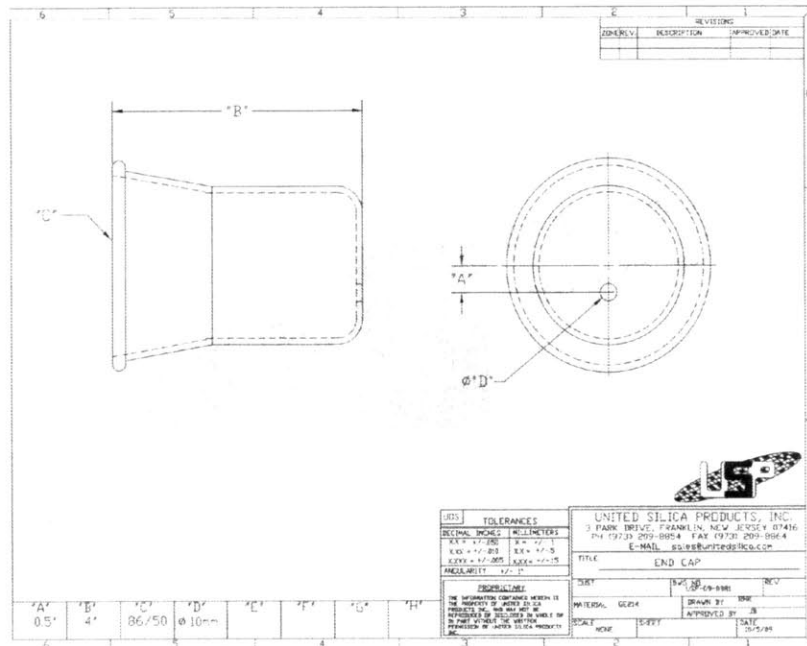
Part drawings for the quartz tube end cap used for high-temperature quenching.
